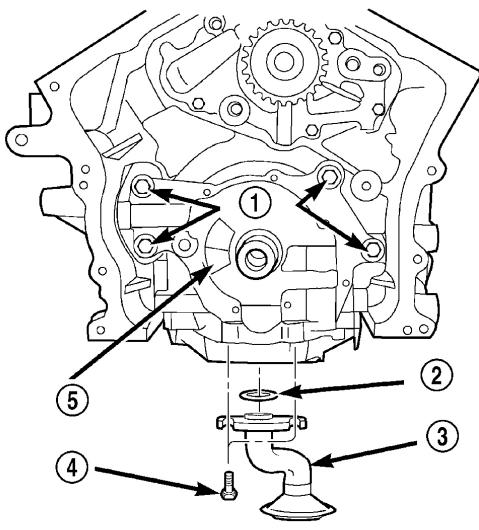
Identifying Oil Pump & Pick-Up Tube Courtesy of CHRYSLER LLC
